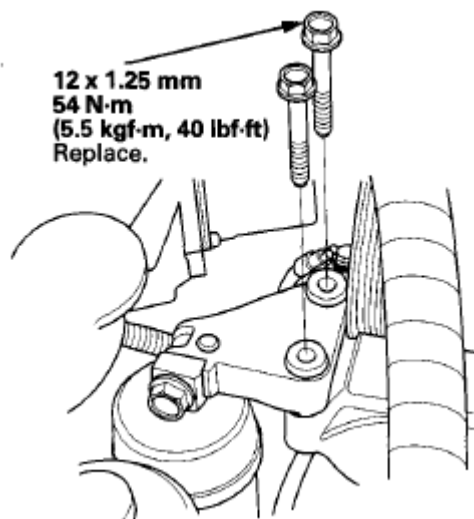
Installing Two New Bolts Securing Upper Engine Mount Bracket With Torque Specifications
